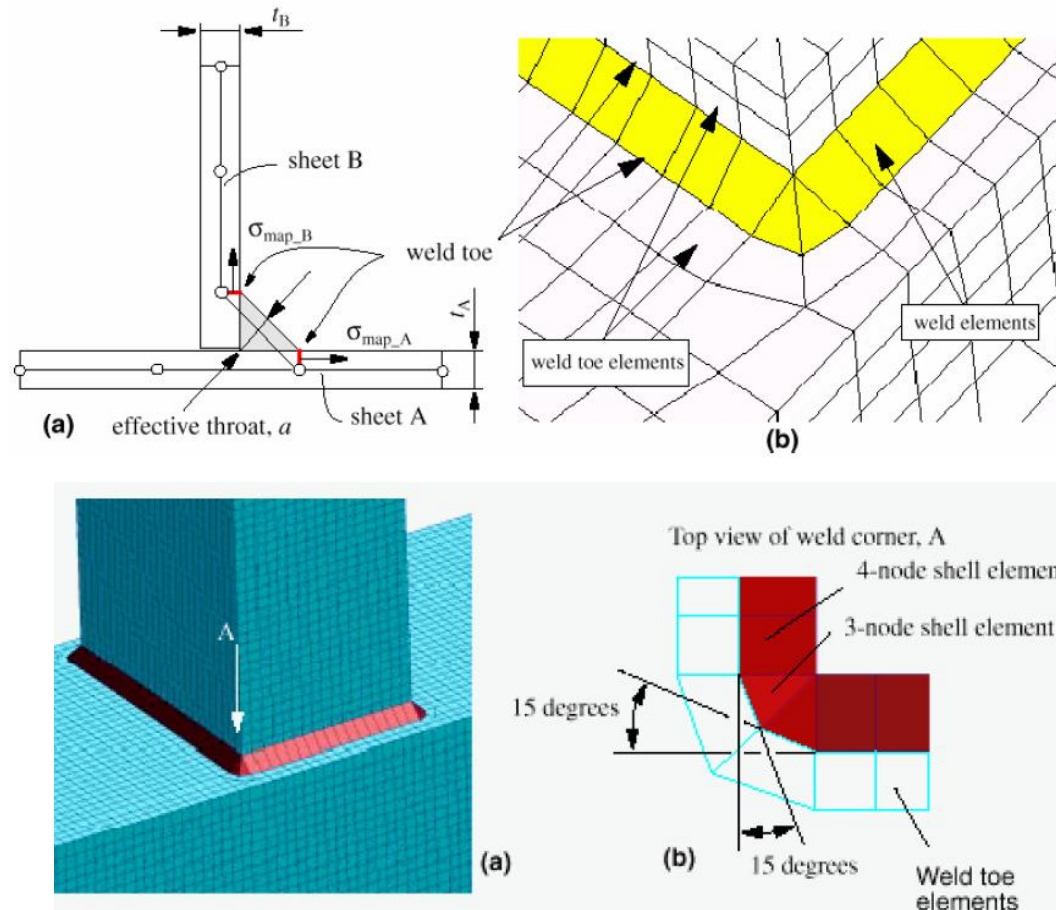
Seam weld modelling of simple T-joint /2/
